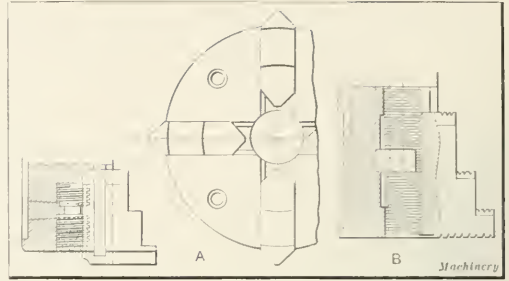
A. Horton Chuck Jaw with Tapered Block; B. Oneida Chuck with Thrust Ring
